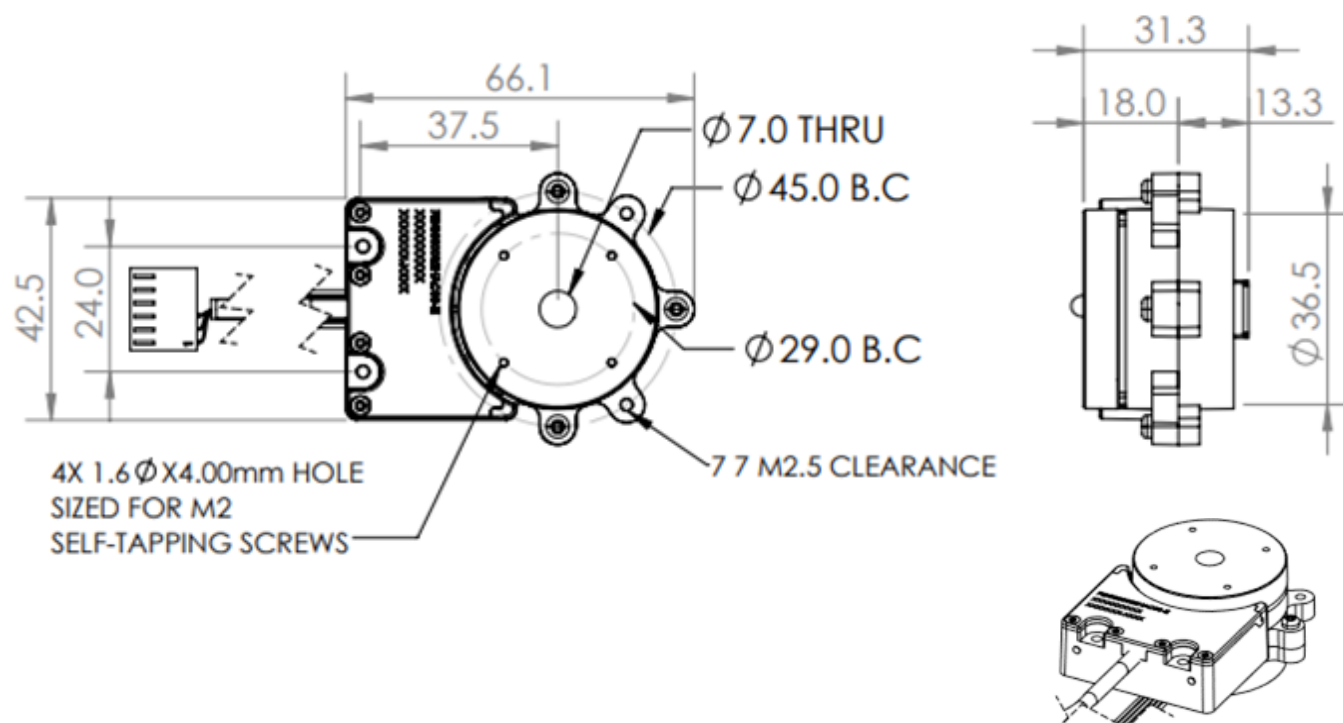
Mechanical Drawing (mm) of RBS Rotary Motor with Encoder
